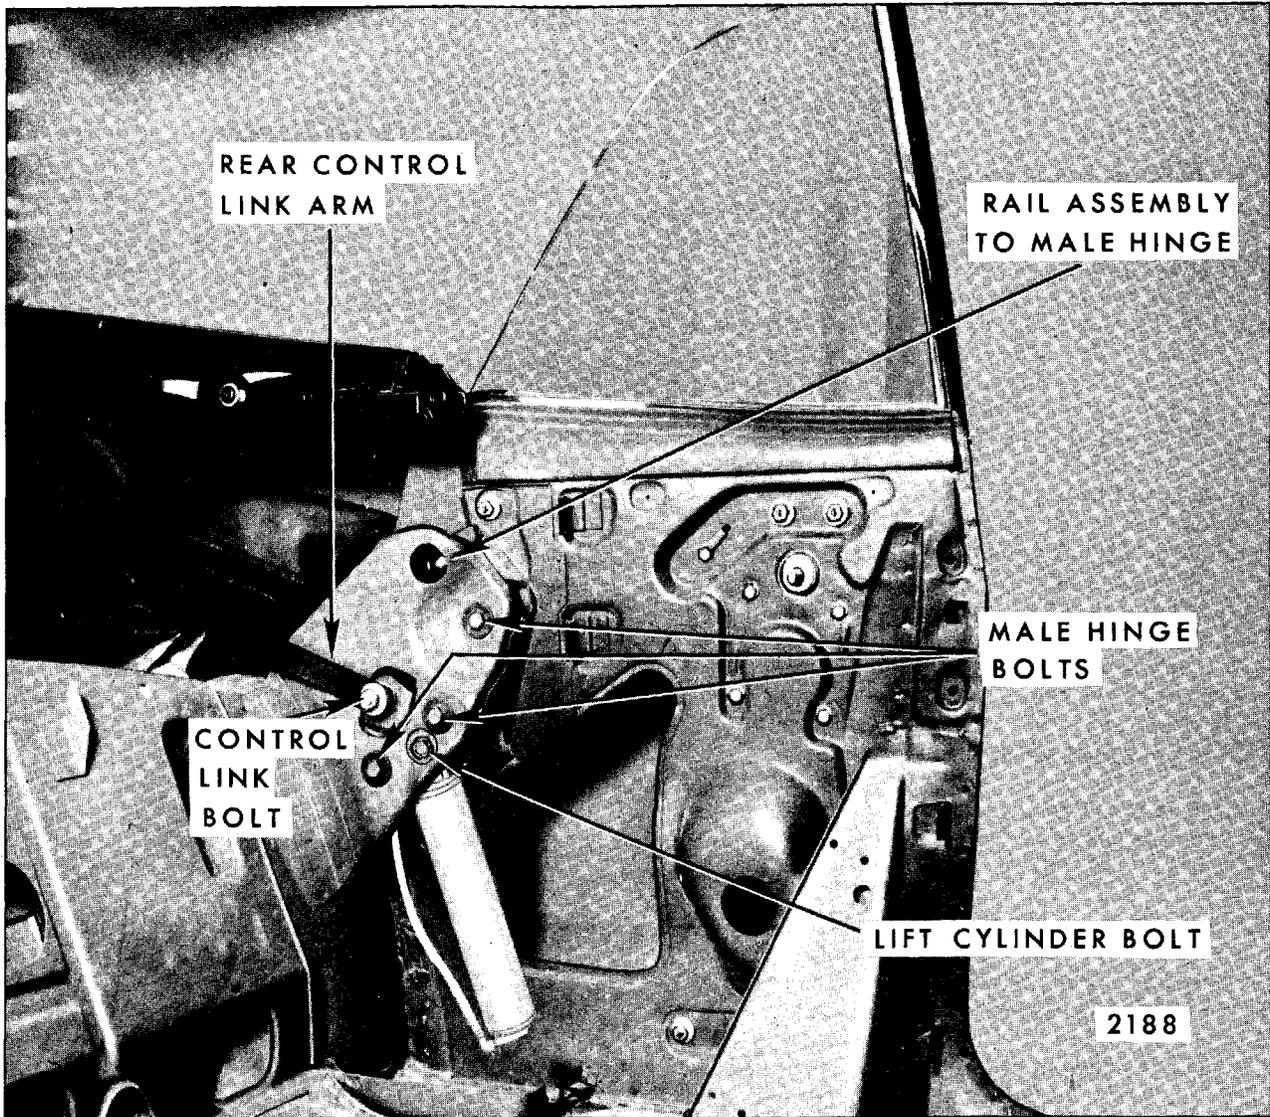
"A" Body Hydraulic Lift Cylinder Attachment
